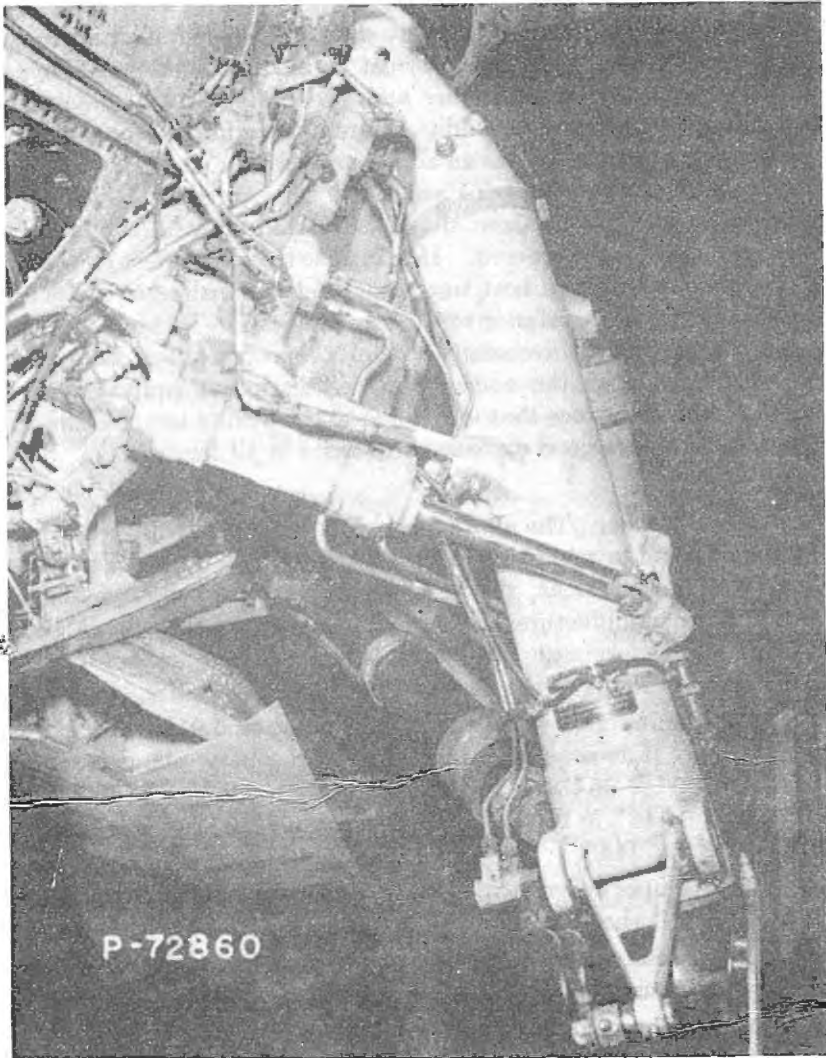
Retractable Landing Gear; 2014-T6 Aluminum-alloy Forging
